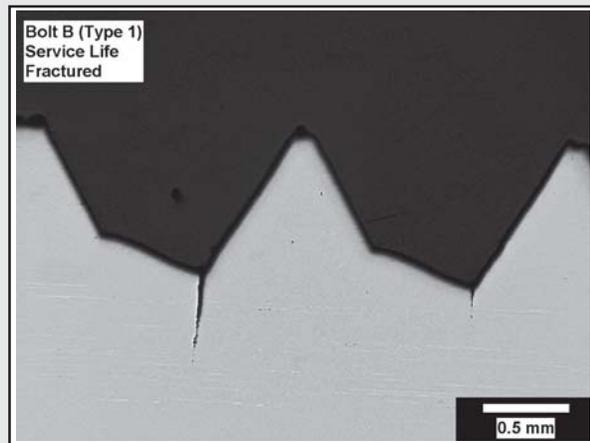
Thread profile in bolt B (type 1 bolt) showing cracks in thread roots and irregular shape of thread form
